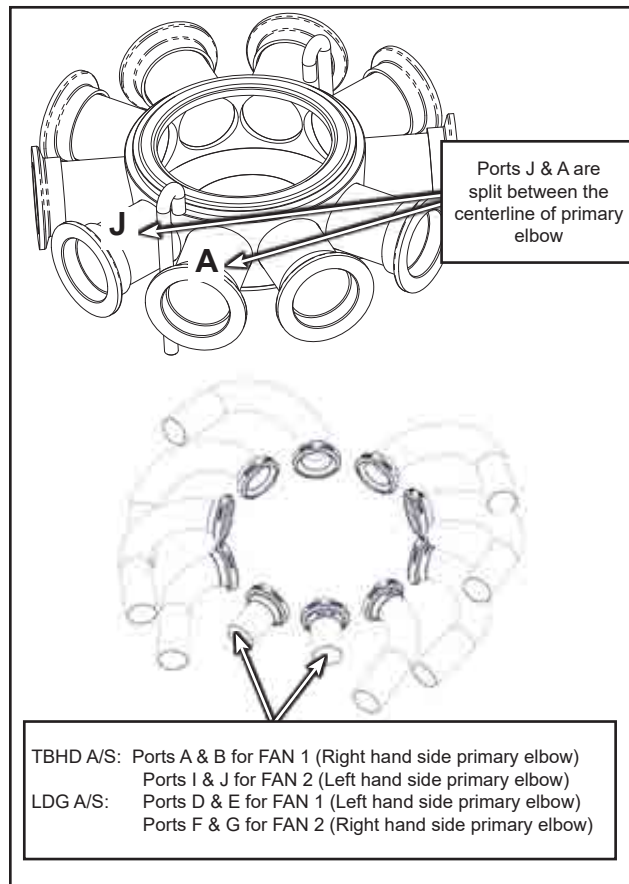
Primary Manifold Head & Elbows - 10 Port
